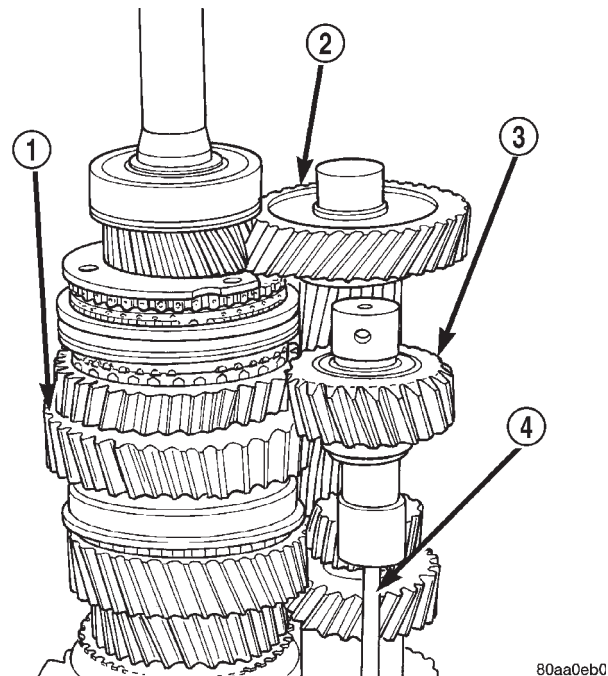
Reverse Idler Assembly Positioned On Assembly Fixture Pedestal
